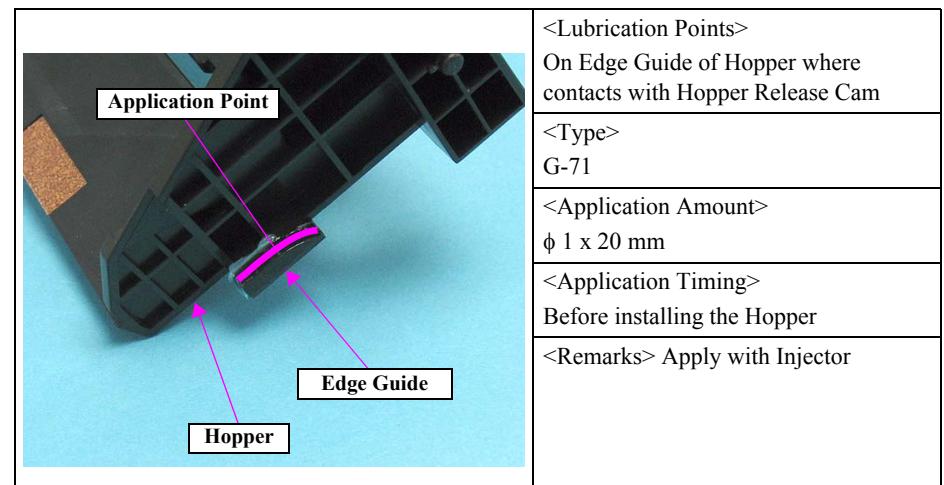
Lubrication of the Rear Paper Guide (4)
